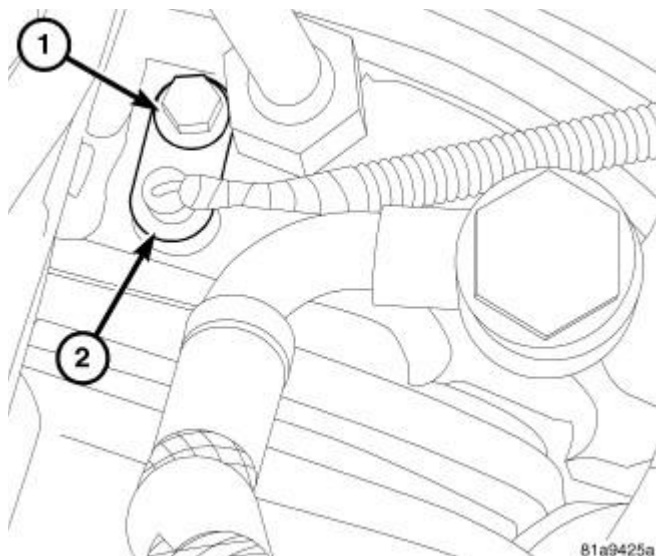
Turbocharger Speed Sensor And Mounting Bolt
